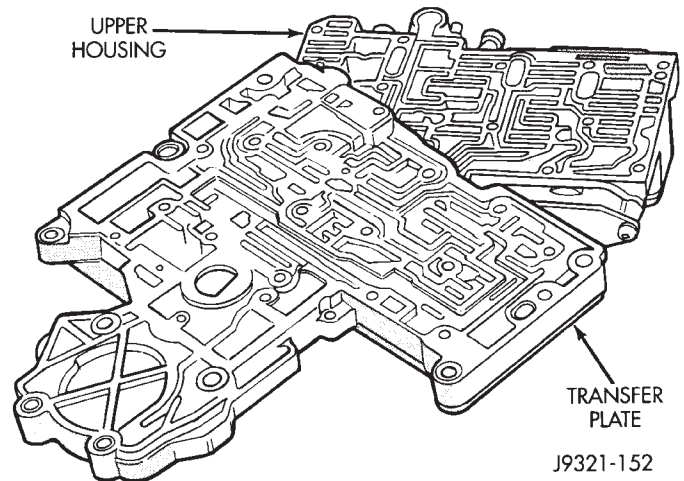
Removing Transfer Plate From Upper Housing—46RH
